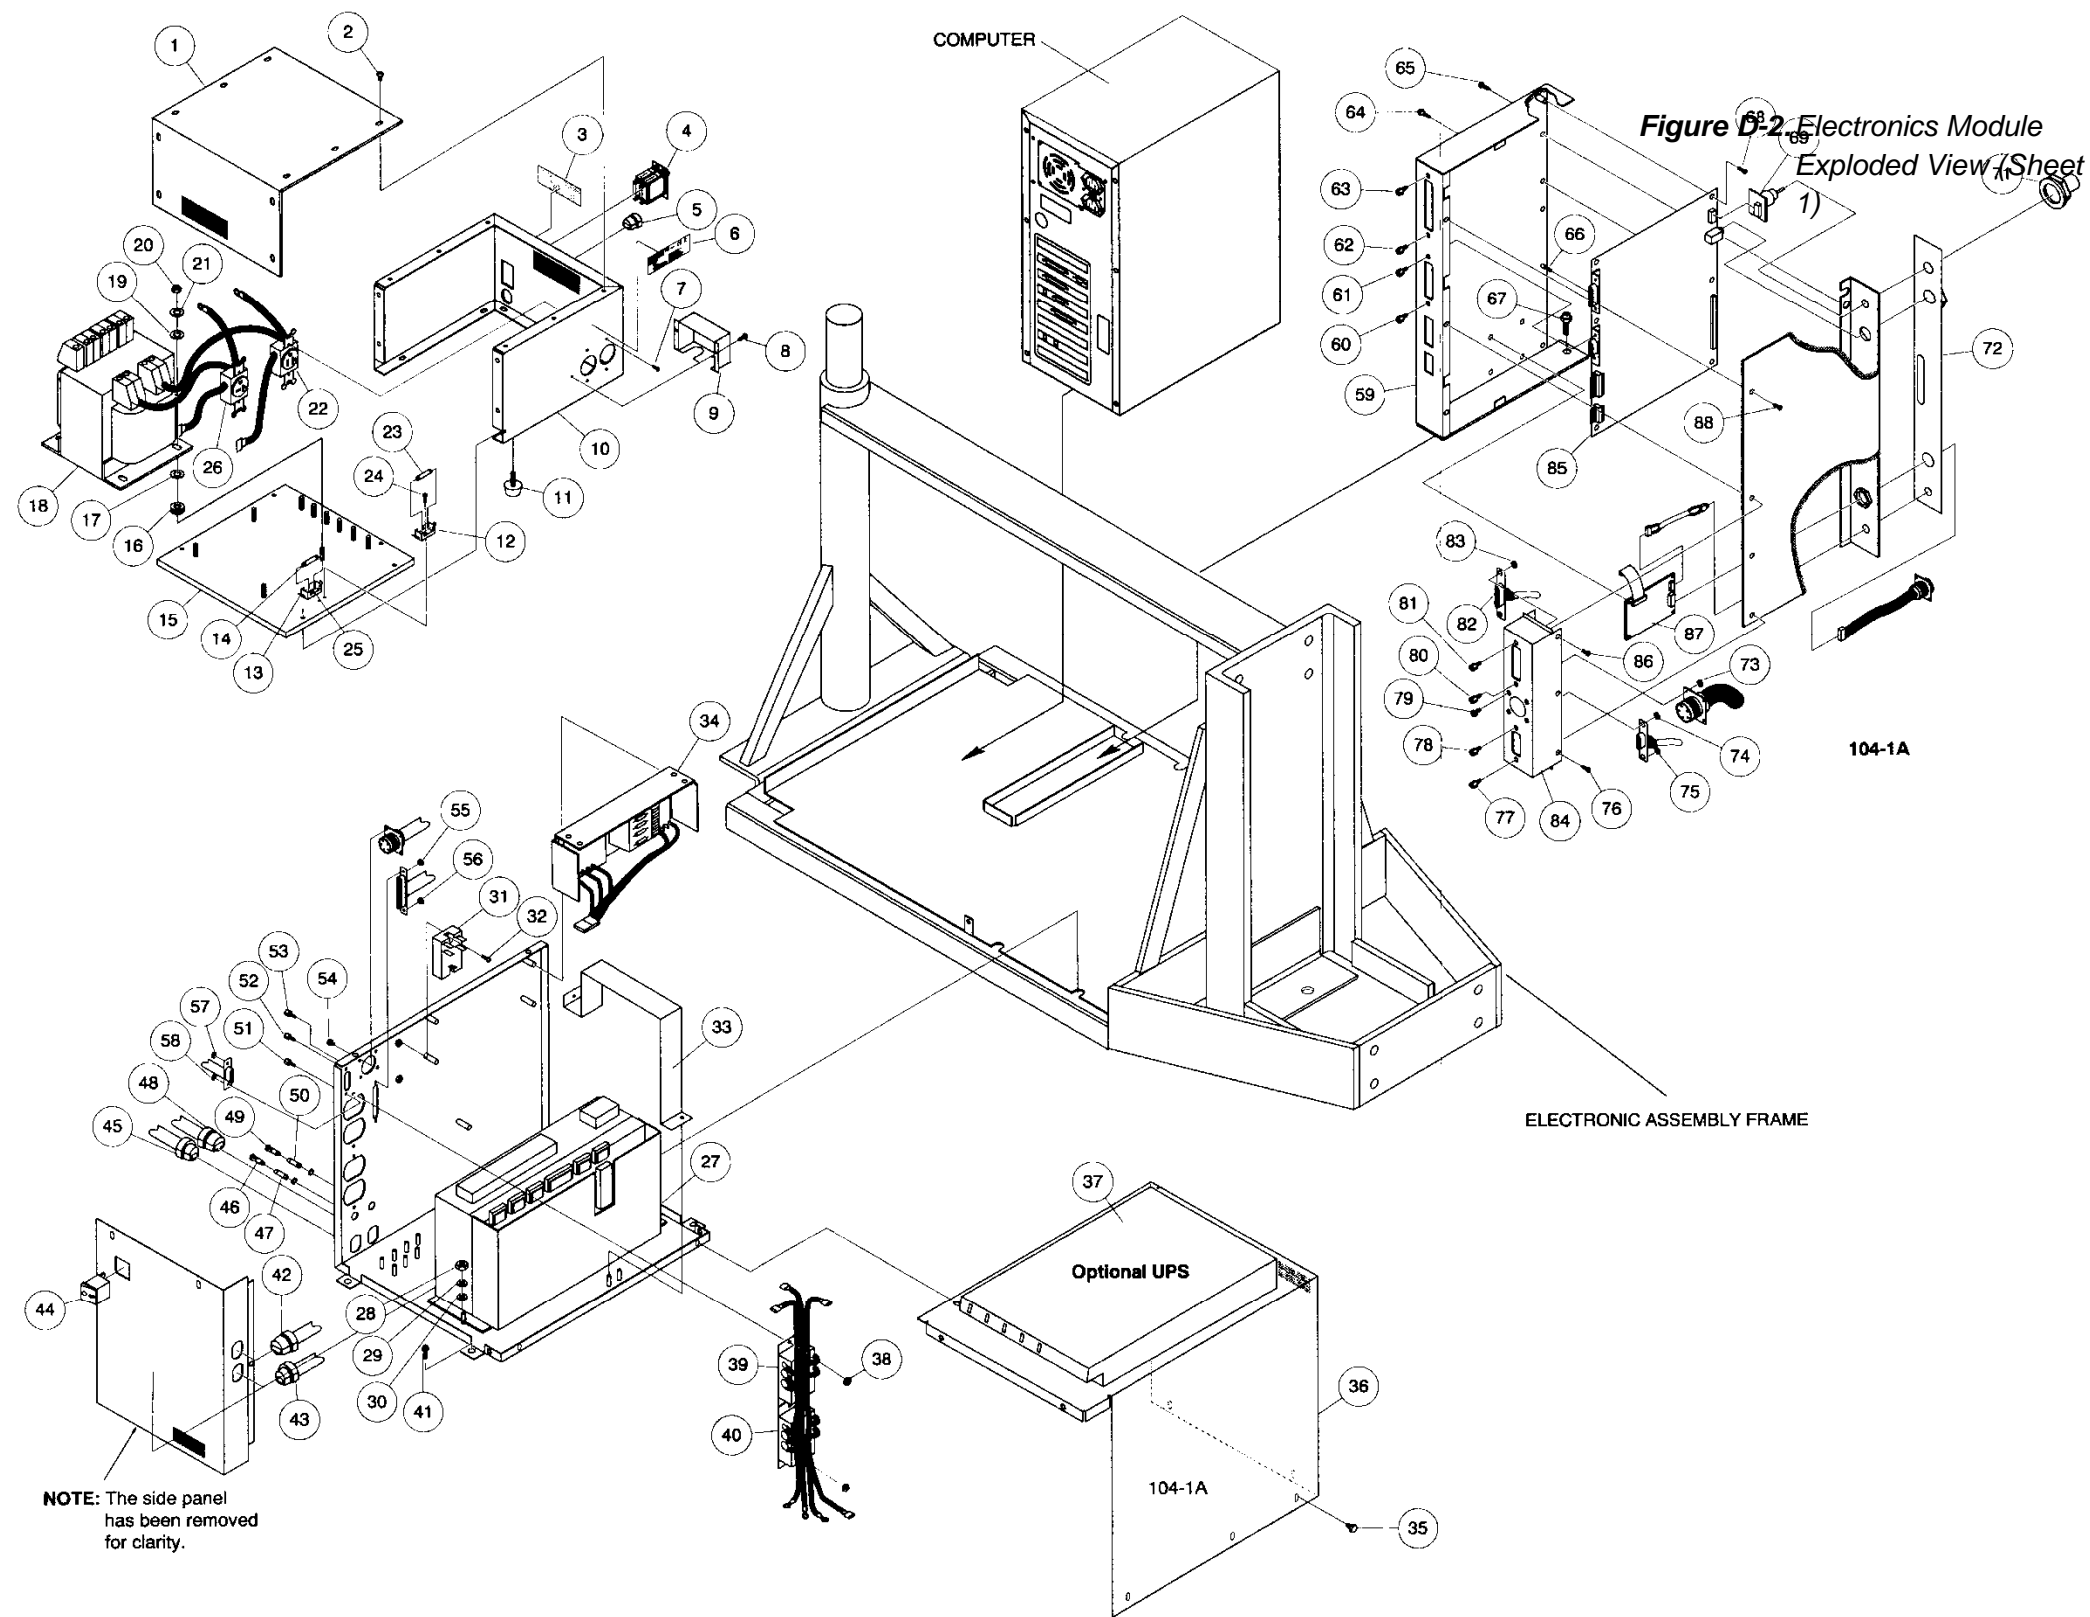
Electronics Module Exploded View (Sheet 1)
